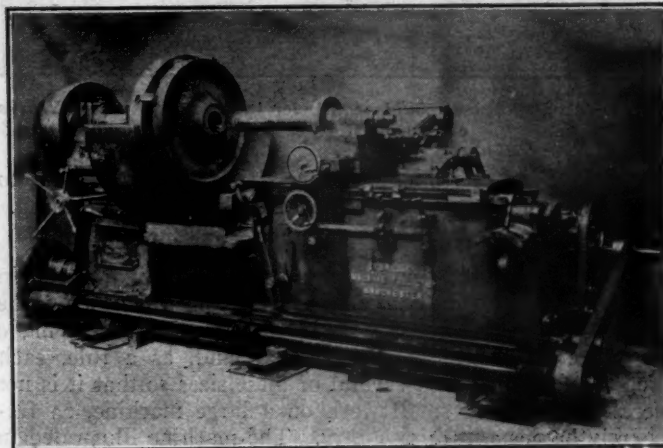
Grinding Car Wheel Bore in Belgian Car Shop
